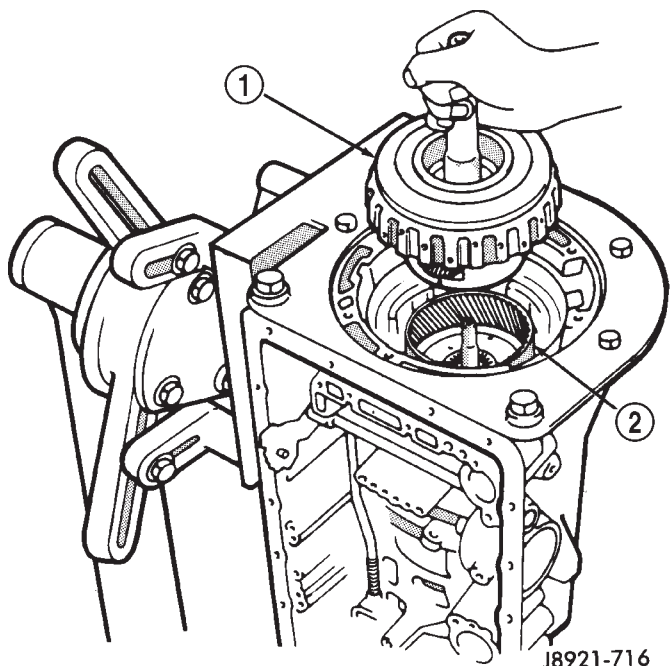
Installing Overdrive Planetary And Clutch Assembly
